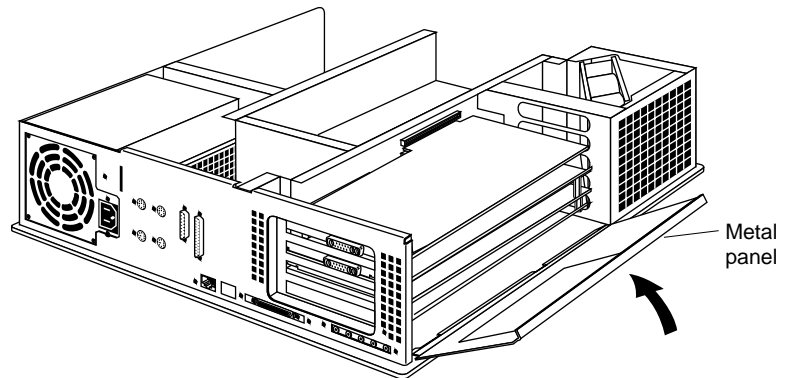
Closing the Metal Panel in Front of the Graphics Boards
